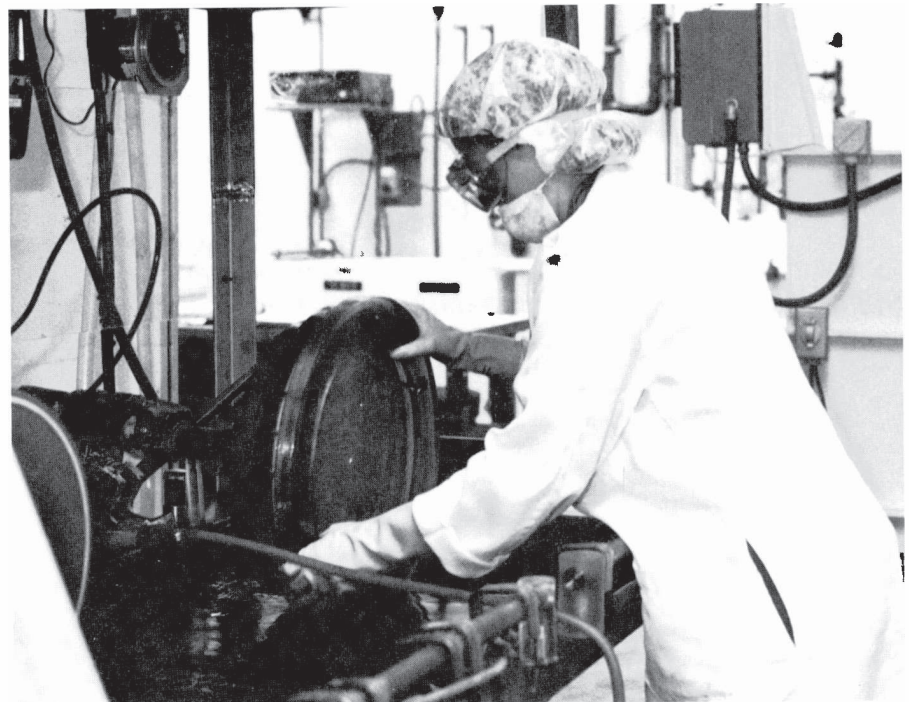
Bright acid copper plating bath. The operator loads a preplated aluminum blank onto the plating head for plating of bright copper deposit. The deposit is used as machining medium for VideoDisc mastering.
